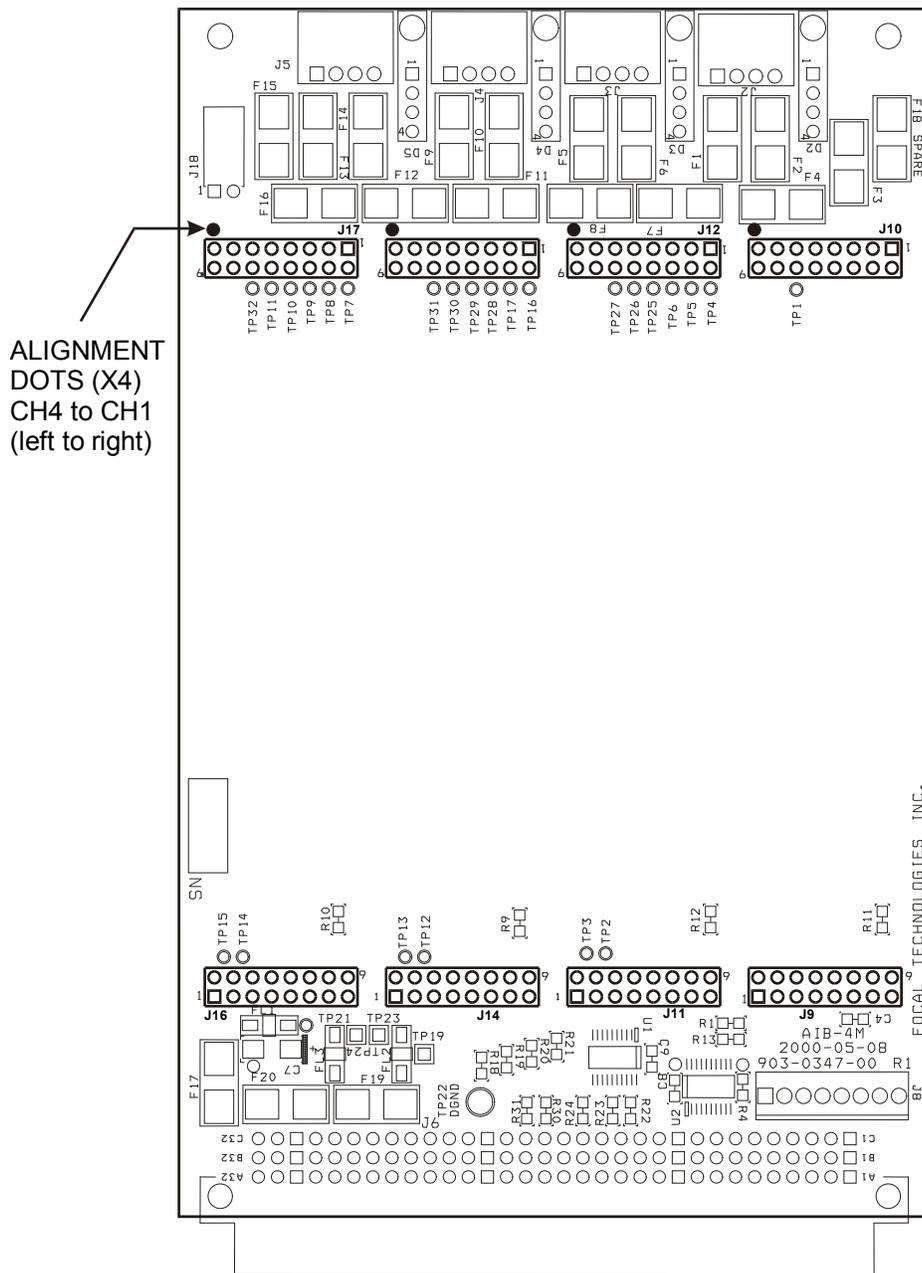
Adaptable Interface Board (AIB-4) PCB
